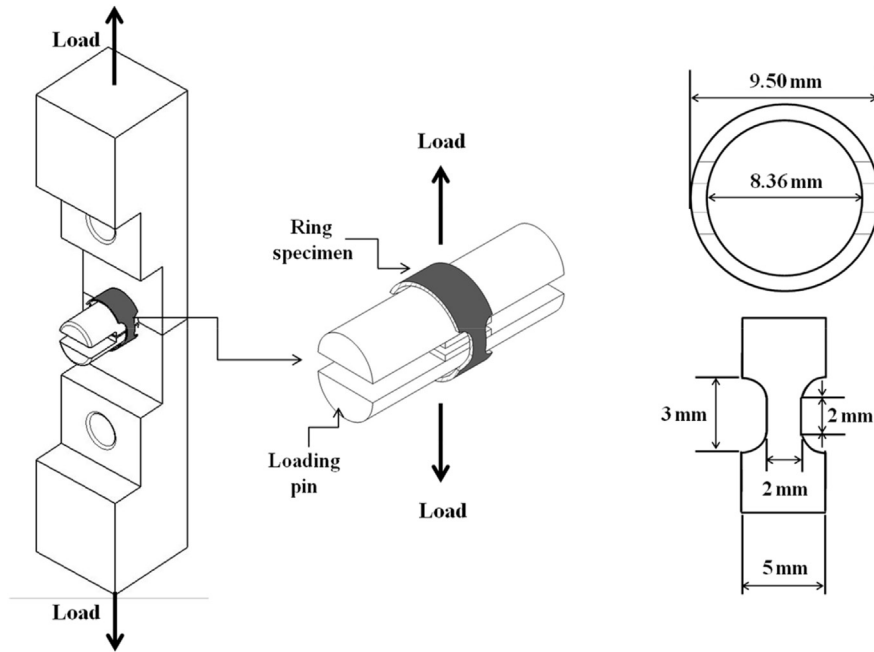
Configurations of a ring specimen and jigs/fixtures used in this work.
